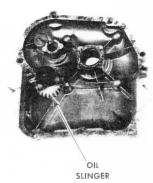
Vertical crankshaft engines use an oil slinger driven by the camshaft.
